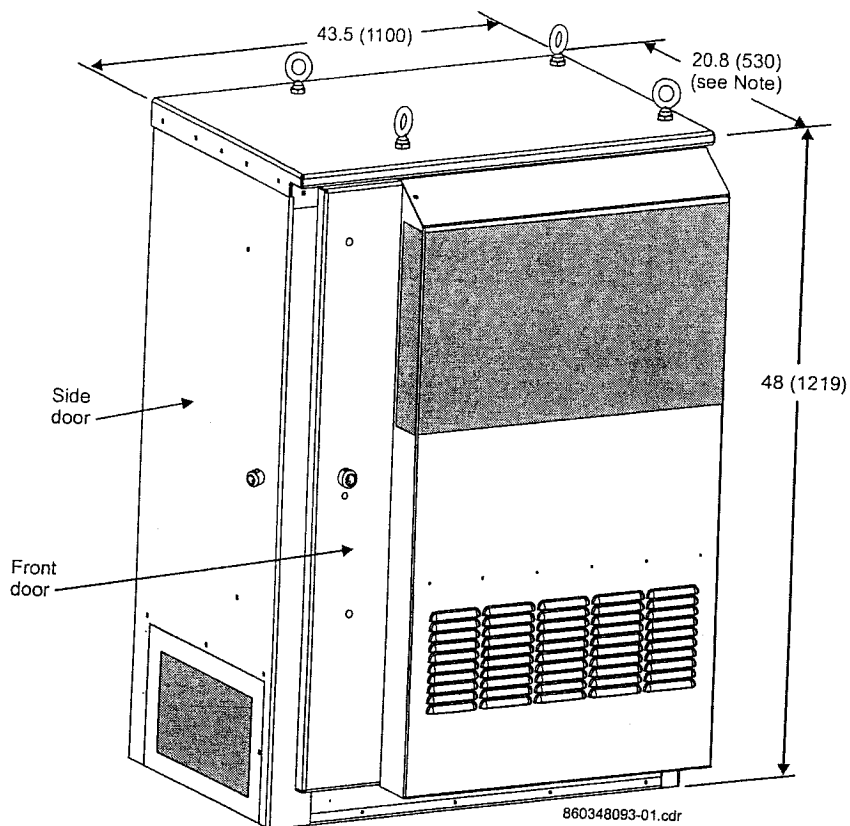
52B Cabinet Dimensions (shown with heat exchanger)
